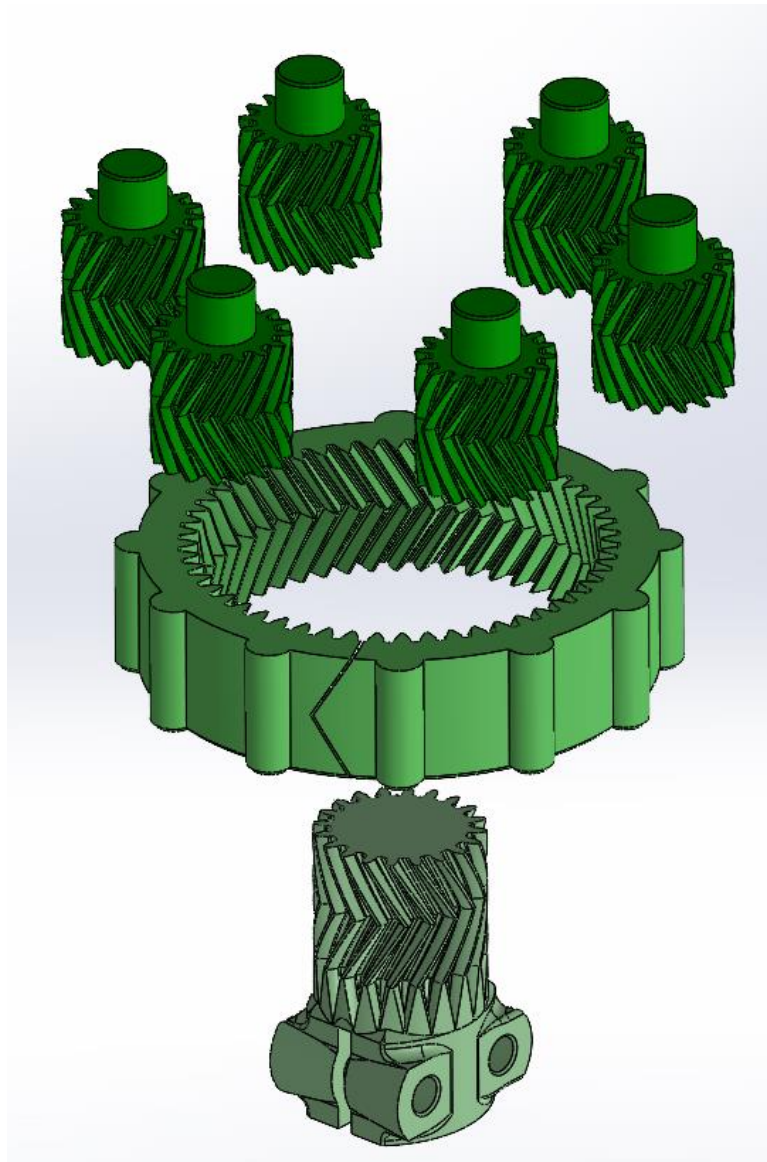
An exploded view of the planetary gearbox designed for ink extrusion with double helical gears. The 6 planet gears on top each have 16 teeth, the ring gear in the middle has 56 teeth and the sun gear on the bottom has 20 teeth.
